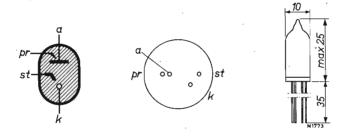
Electrode arrangement, electrode connections and maximum dimensions in \mbox{mm} .
